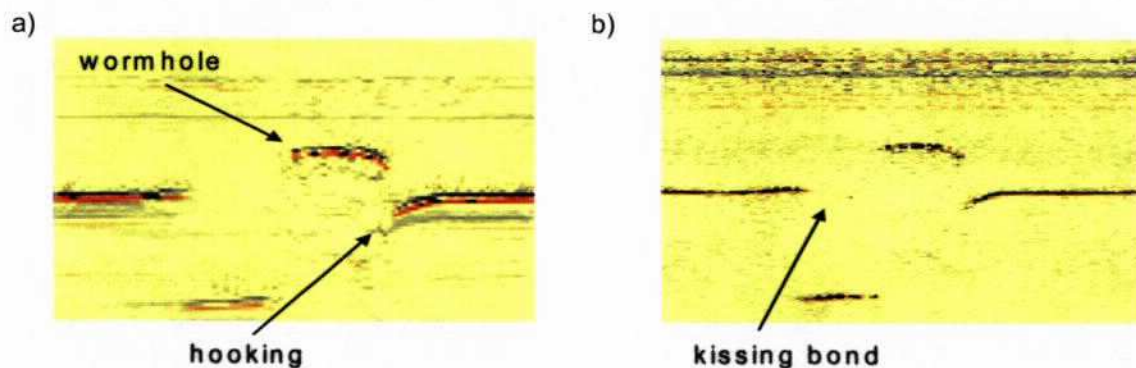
Cross-section of the lap joint in Figure 5, with inspection from the far side of the tool. SAFT image using a) immersion and b) laser-ultrasonics.
